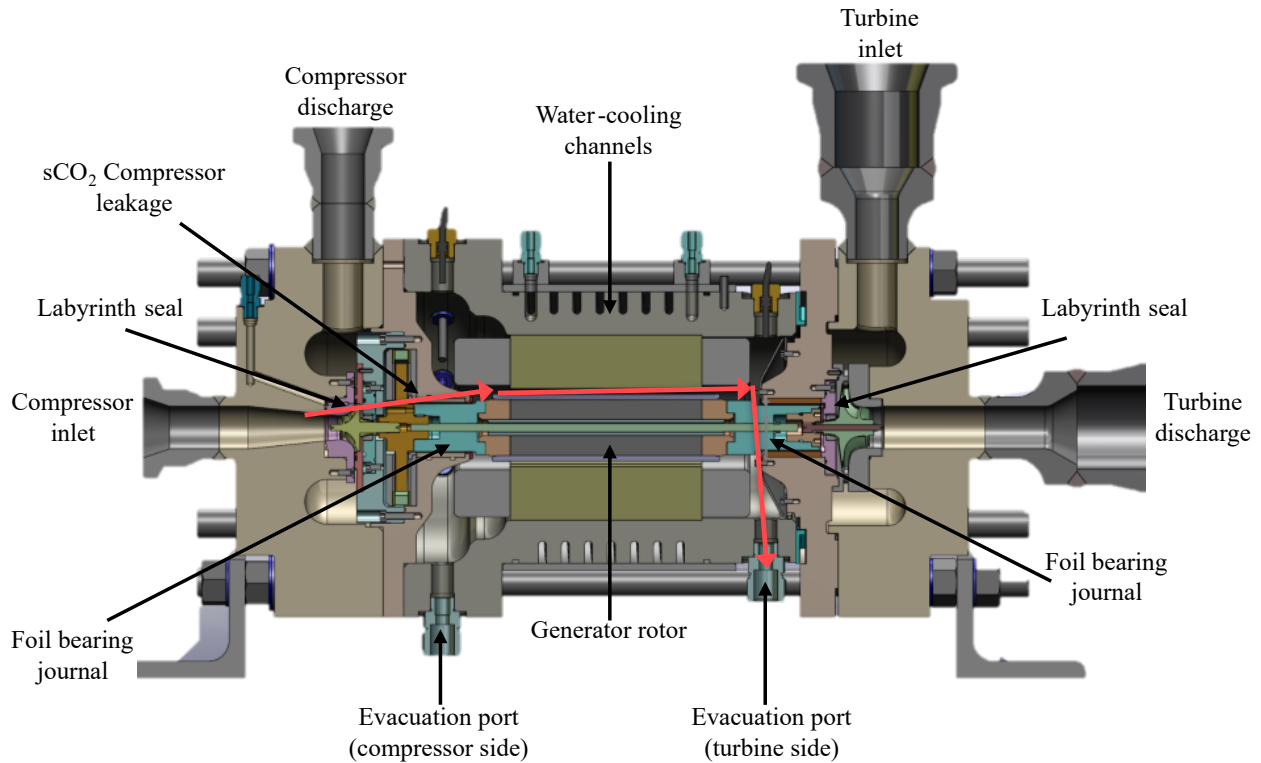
Sandia National Laboratory sCO₂ turbogenerator demonstration machine showing the design with gas foil bearings, labyrinth seals, and a PM rotor for the turbine-alternator-compressor (TAC) design, along with the proposed leakage flow path for cooling the machine, as indicated by the red arrow.
